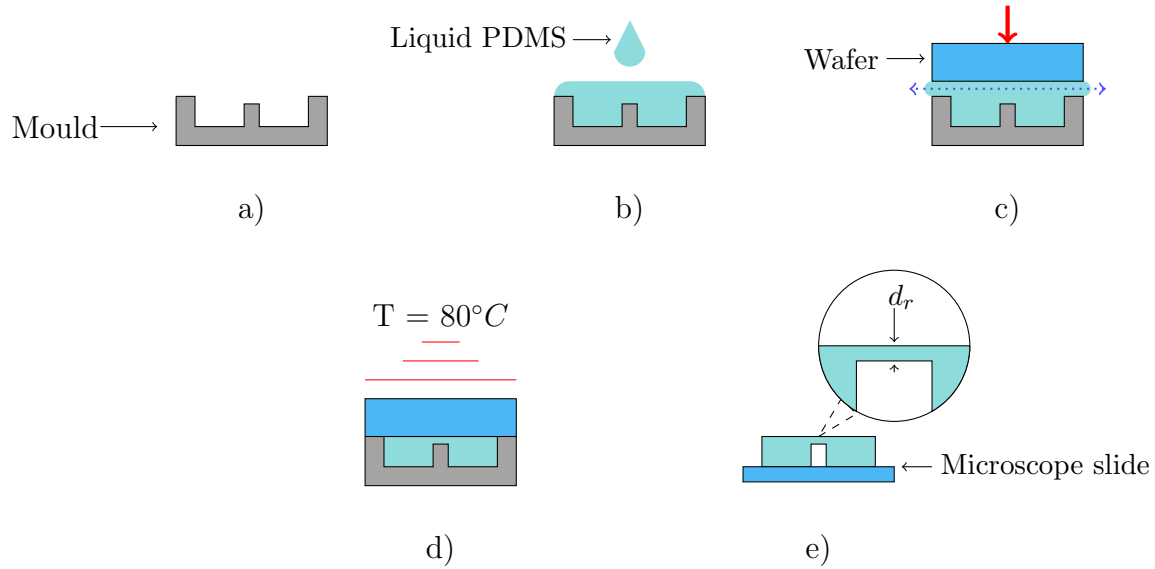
The exclusion-negative replica moulding process. a) A mould is fabricated. b) Liquid PDMS is cast into the mould. Care must be taken not to trap bubbles in fine mould features. c) A borosilicate glass wafer is used to evenly apply pressure onto the mould, expelling any excess PDMS. d) The mould is baked at 80°C for two hours to cure the PDMS. e) The PDMS channel is demoulded, and bonded to a microscope slide using oxygen plasma. The thickness of the roof (annotated as d_r) is now precisely defined by the dimensions of the mould as the borosilicate wafer has expelled any excess PDMS material.
